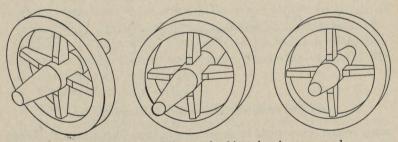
Isometric, oblique and cabinet drawing compared.
